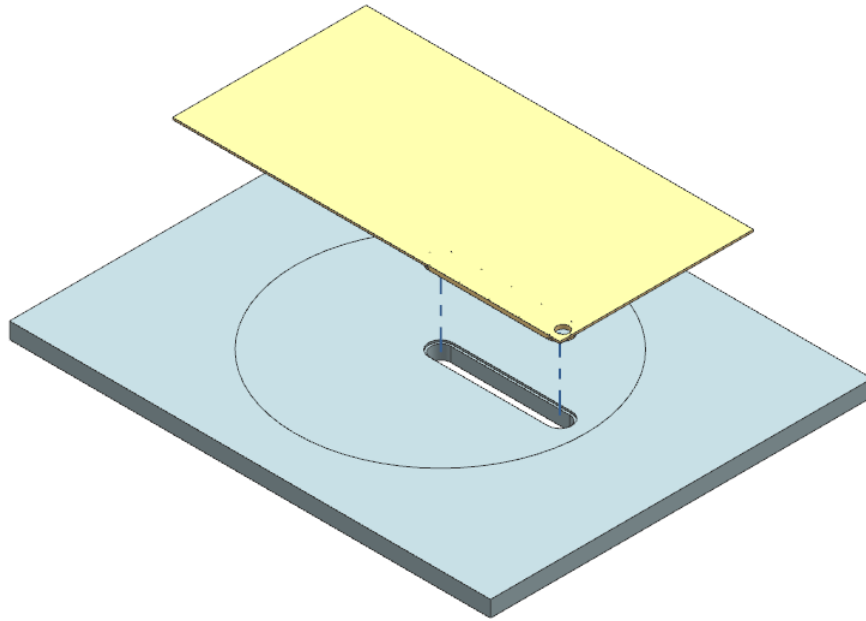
CAD - Wind Tunnel Test Section with Test Board
